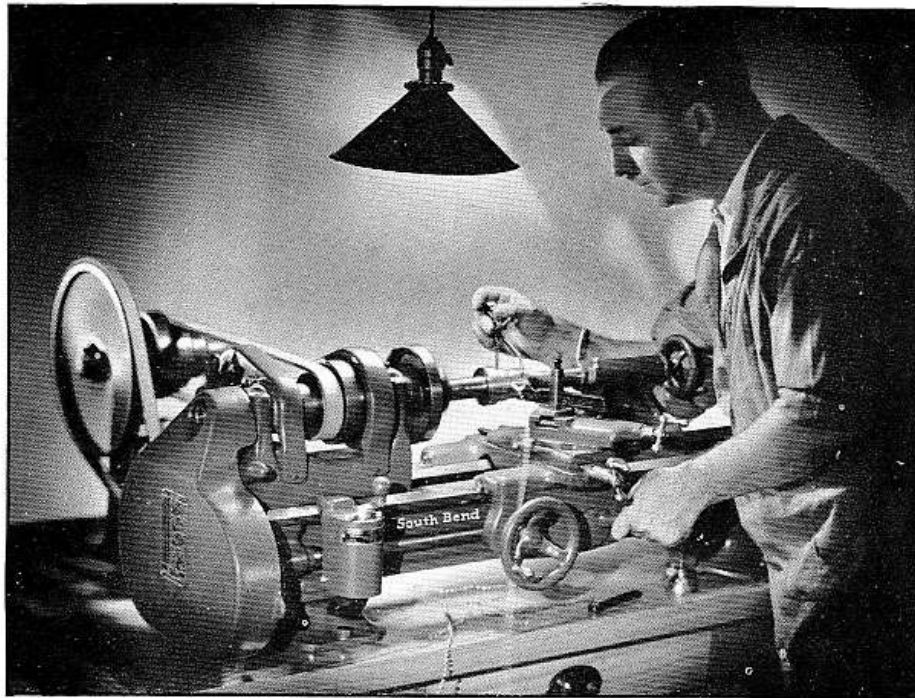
Making a Replacement Bushing in the 9-inch "Workshop" South Bend Precision Lathe.
